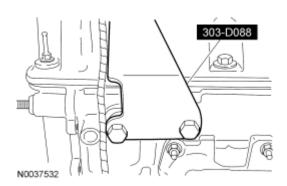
Installing Special Tool To LH Cylinder Head Courtesy of FORD MOTOR CO.
